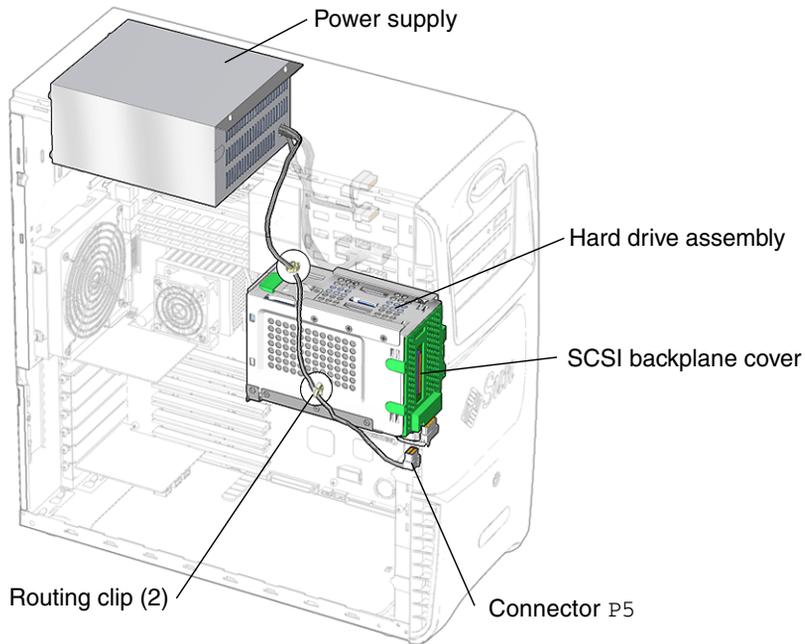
Disconnecting Power Supply Cable Connector P5 From the Hard Drive Assembly
